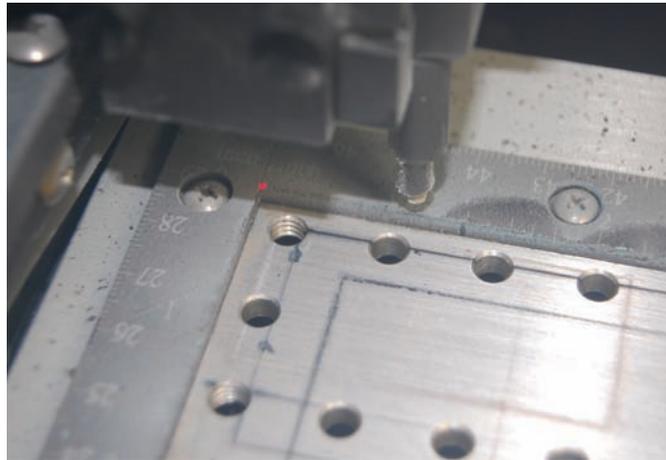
The "plunger," or focusing tool, is a unique design only used on GCC lasers.
